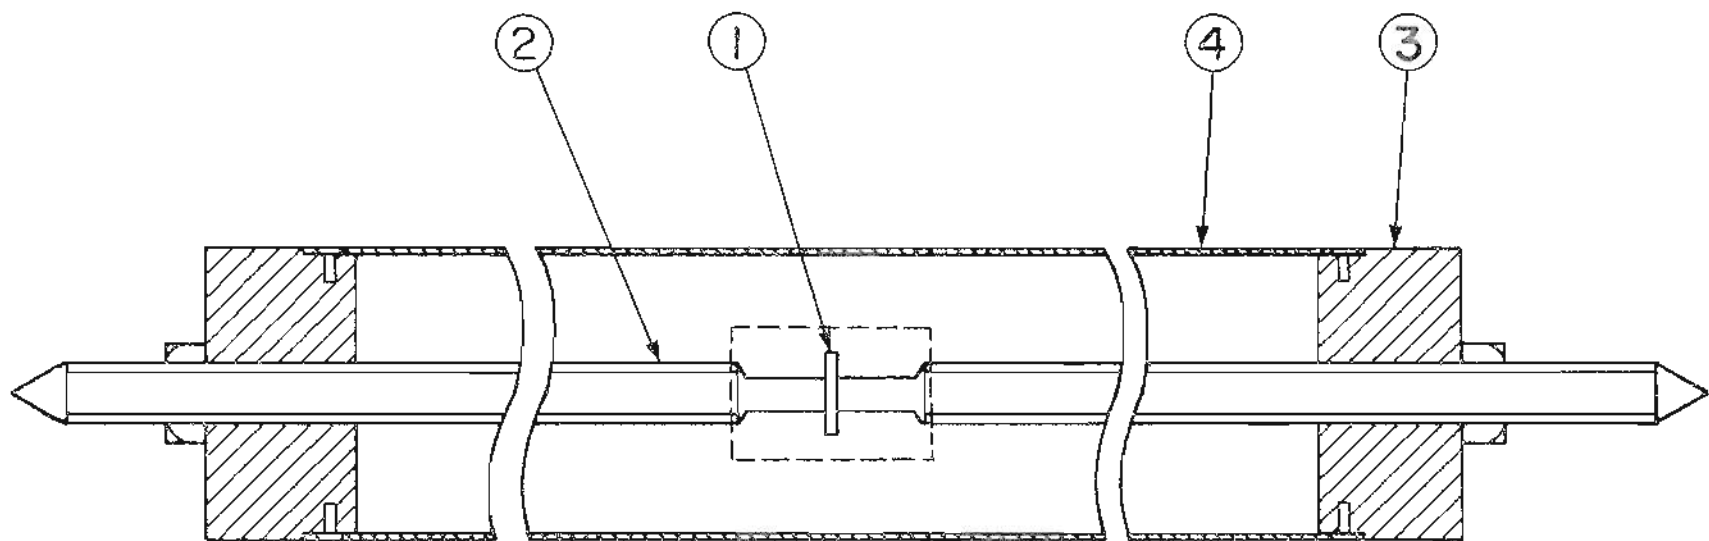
SAMPLE HOLDER FOR DEGRADATION MEASUREMENT 1) SAMPLE, 2) BRASS ELECTRODE, 3) OUTER STAINLESS STEEL TUBE, 4) TEFLON BUSHING
